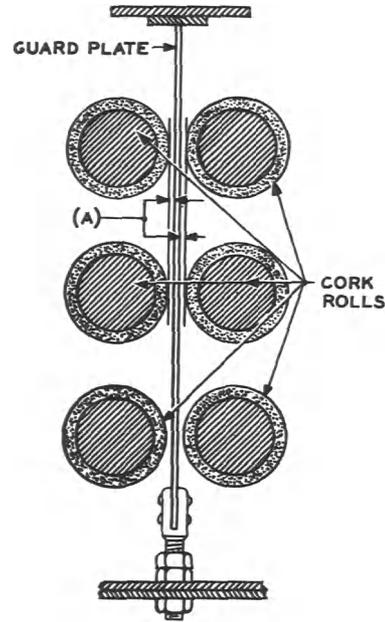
Clearance Between Guard Plates and Cork Rolls
